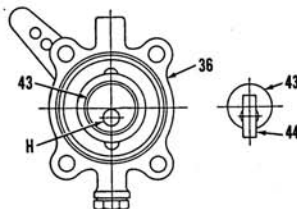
When installing shifter assembly be sure hole (H) in shifter shaft (43) is below shaft centerline before inserting shifter (44).
